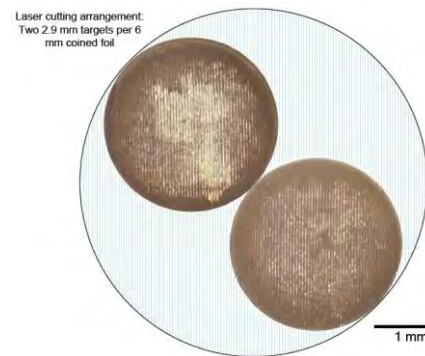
Geometry where two 2.9 mm targets are laser cut from a single coined 6 mm disc.
